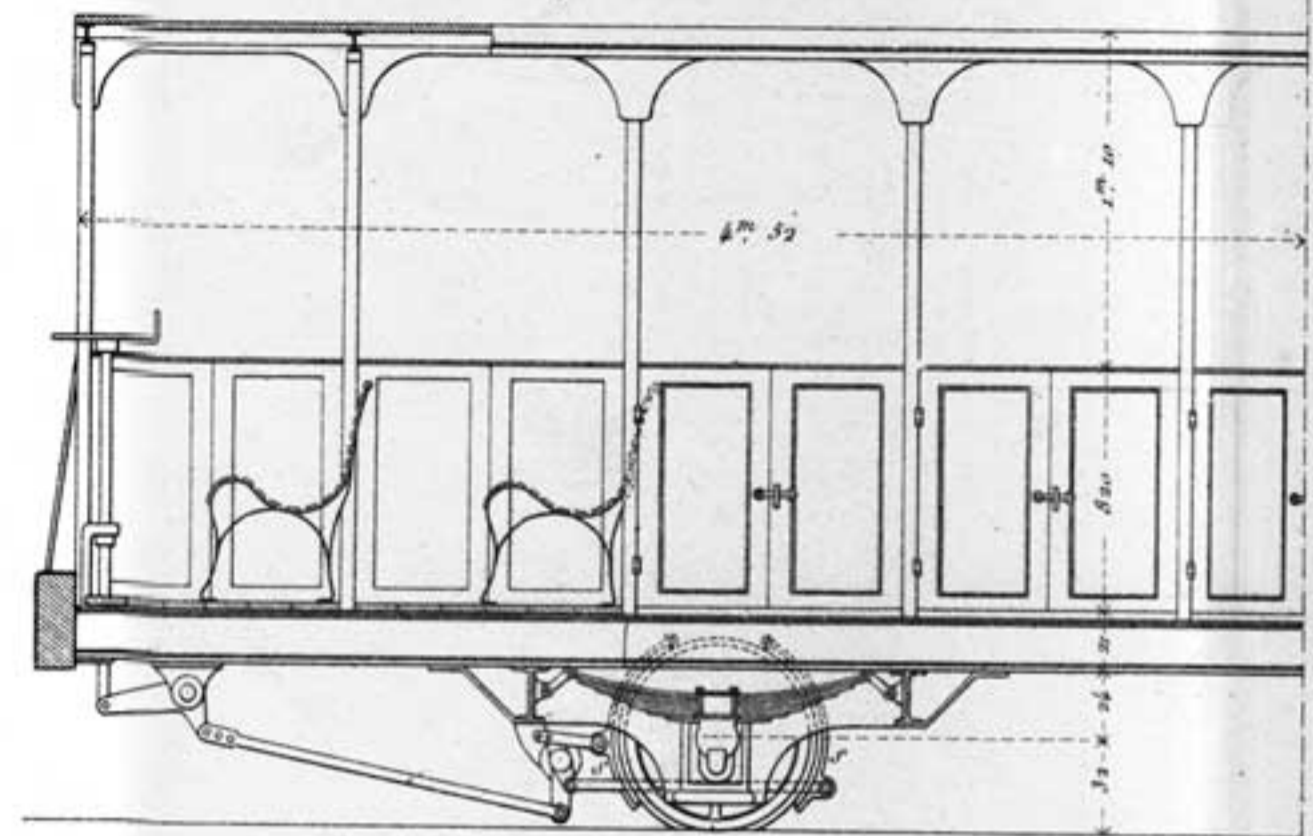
Coupe longitudinale. A longitudinal section of the passenger wagon showing the internal layout and seating arrangement.
